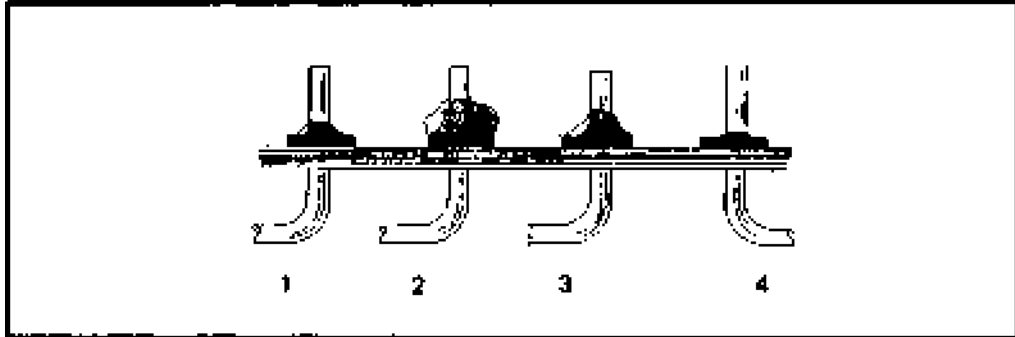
Good and bad soldering joints. 1. Too little solder; 2. Too much solder; 3. Good; 4. Too little solder, cold joint.
